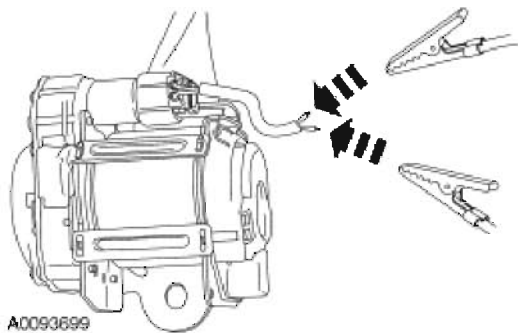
Attaching Jumper Wires To Safety Belt Retractor Pretensioner
